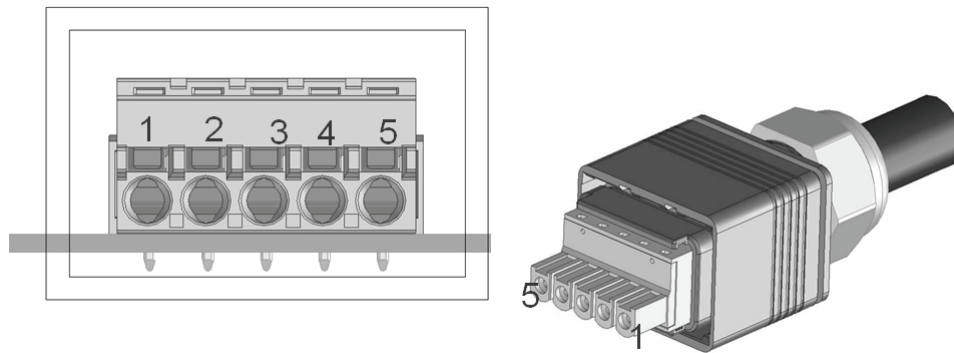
Contact arrangement and pinning of the Push Pull Plug 24 Volt Connector
